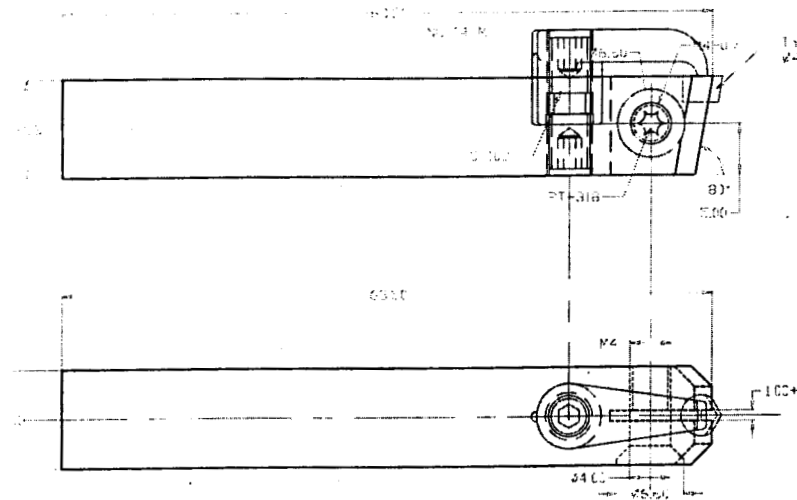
The drawing of diamond cutting tool with round cutter of small size and steel holder
